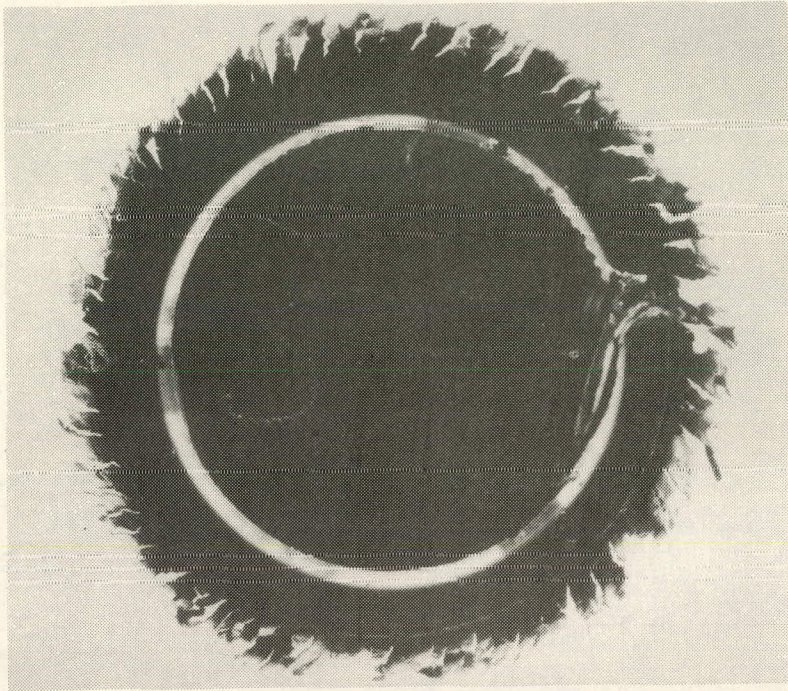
Poisson Burr Showing Early Radial Cracking
